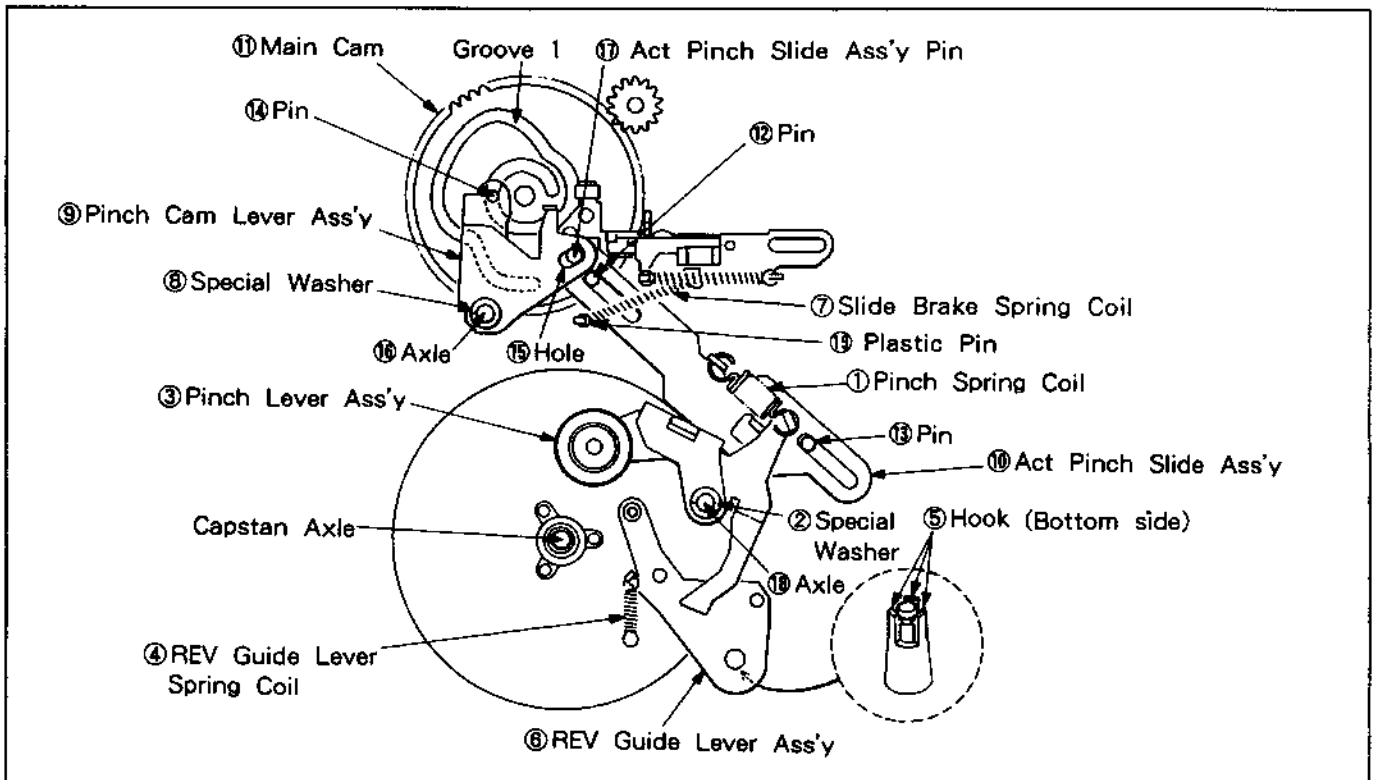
Pinch Roller Pressure Mechanism
